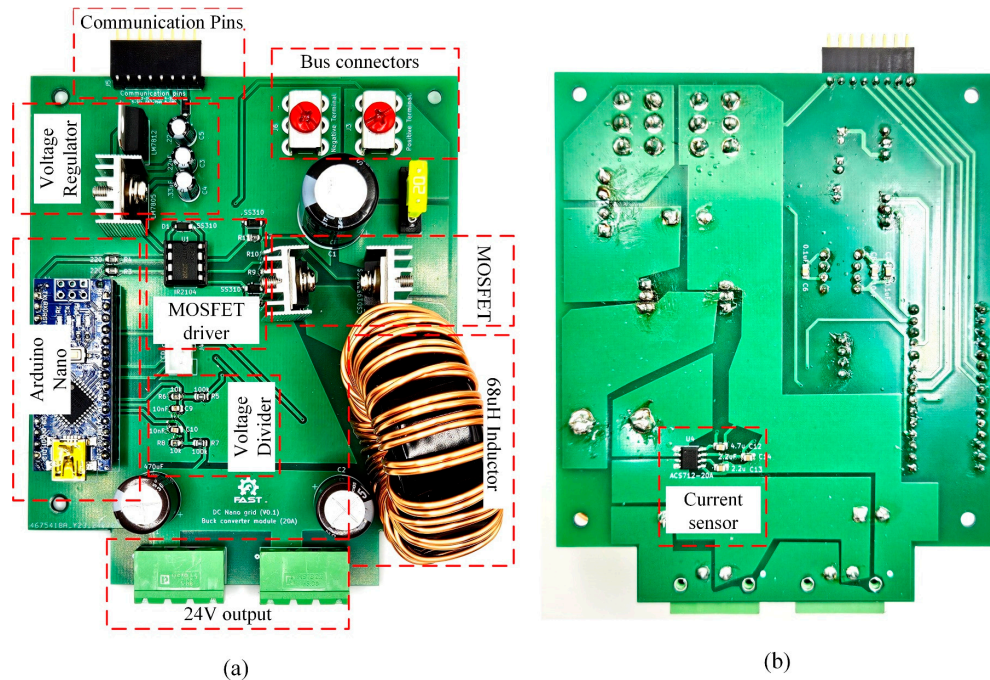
Buck converter PCB with components (a) front side (b) back side.
